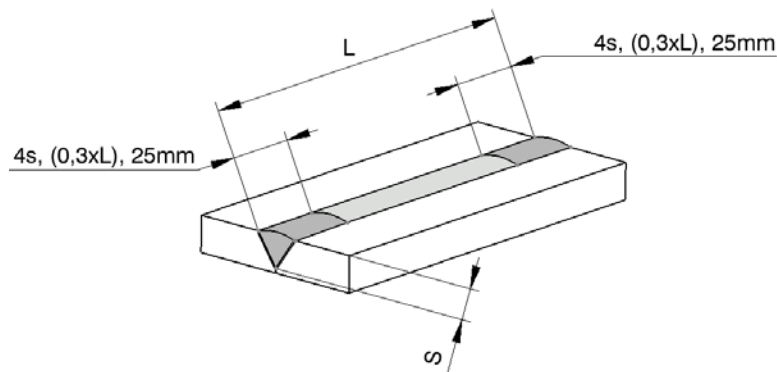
The s-dimension may be below the specified value but only at the ends of a butt weld
